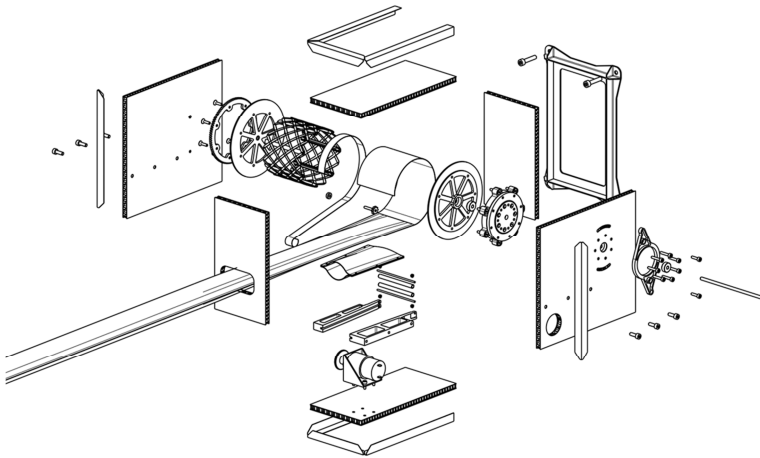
Exploded view of the baseline design of the Deployment Mechanism displayed for a tubular, double-omega shell mast.
